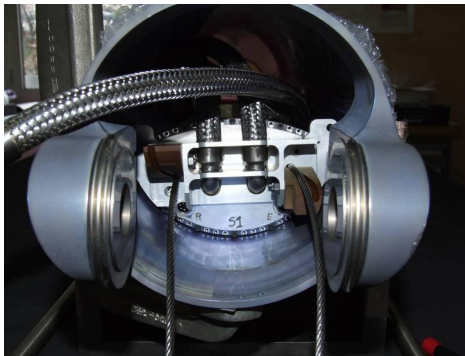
Vue of the rotation box assembled into the tube (First segment)
